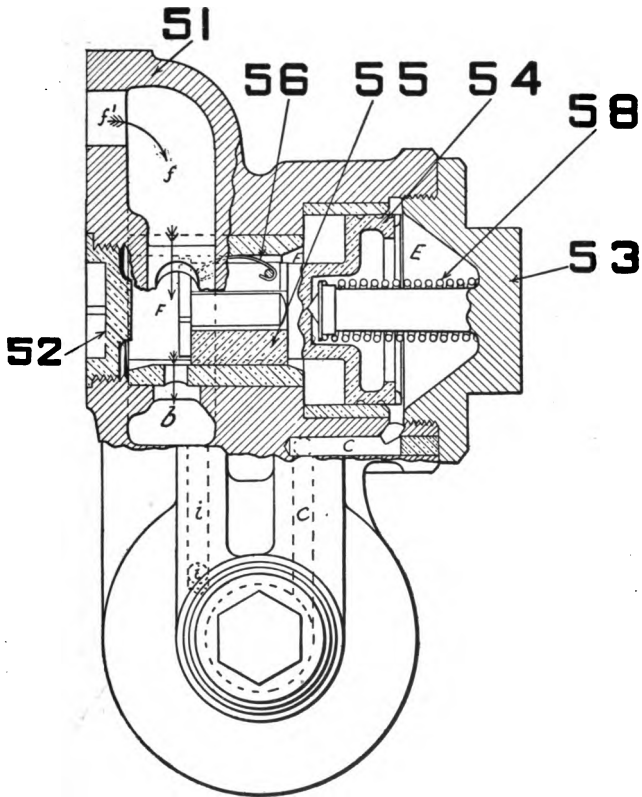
and 11 illustrate the device known as the Slide-Valve Feed Valve, which may be used with either the "D-5," "E-6," "F-6" or "G-6" Brake Valve, to maintain a predetermined trainpipe pressure while the brake-valve handle is in Running Position.
